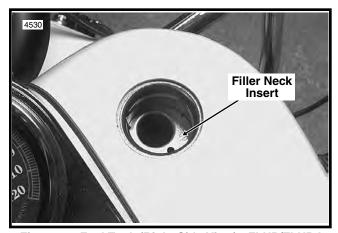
Fuel Tank (Right Side View) - FLHP/FLHP-I
